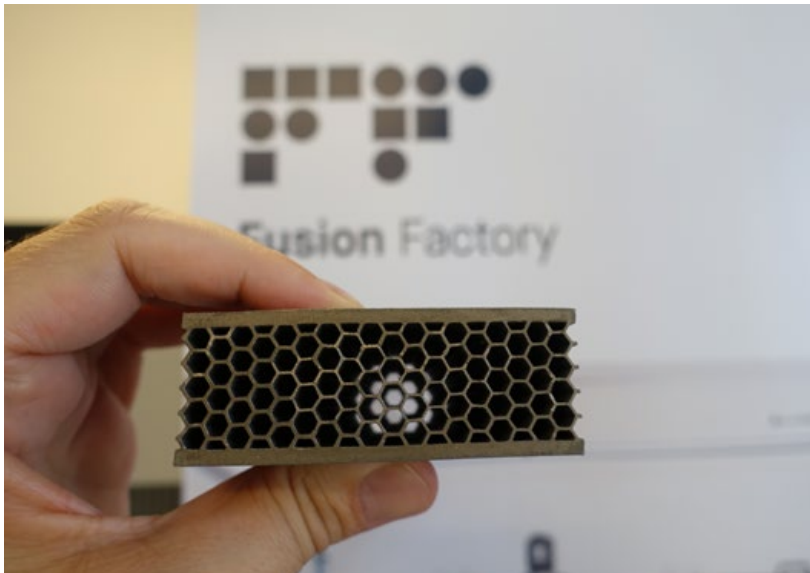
Additively manufactured sandwich plate in stainless steel [Courtesy XERION]
